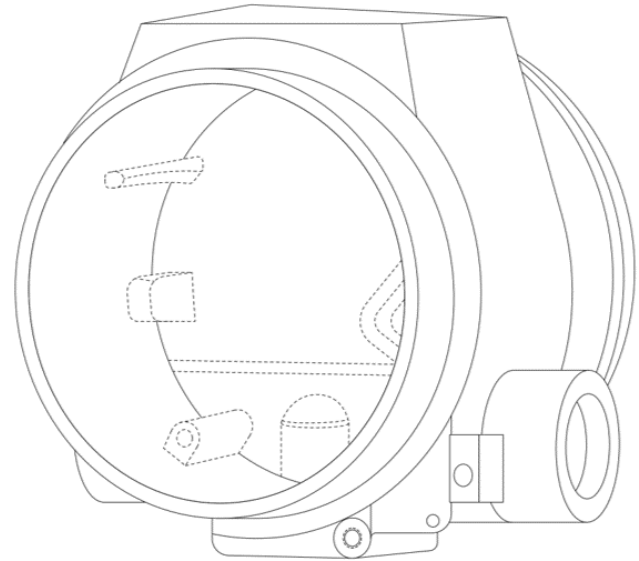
THREE-DIMENSIONAL VIEW WITH DEVICE
